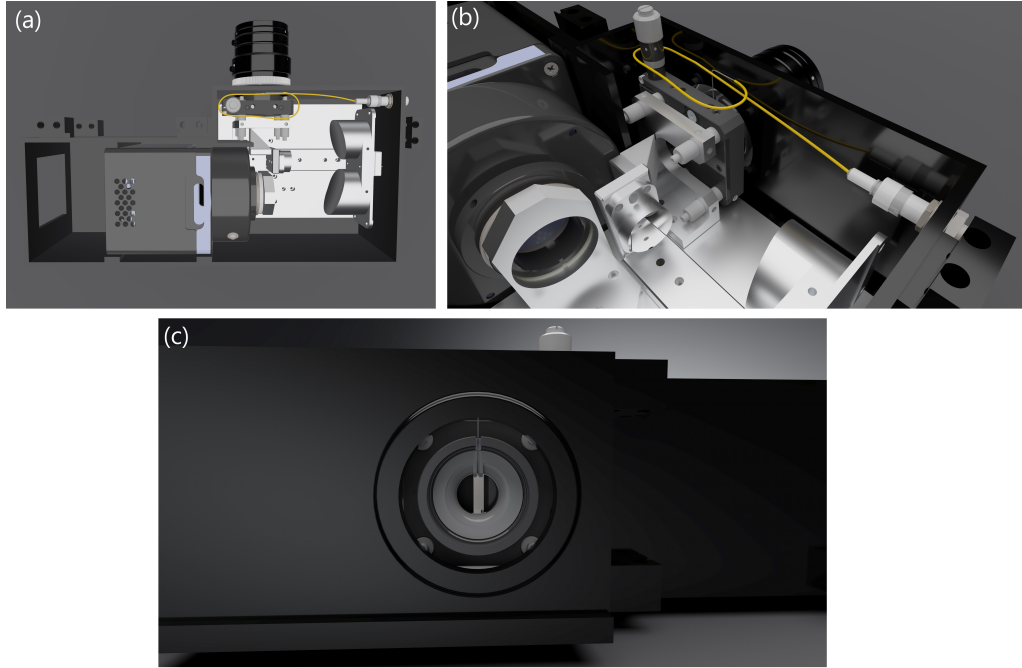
Rendering of fibre system, showing (a) a wide angle view of the system, (b), a close up of the fibre/needle assembly, and (c), a close up of the needle and mounting plate.
